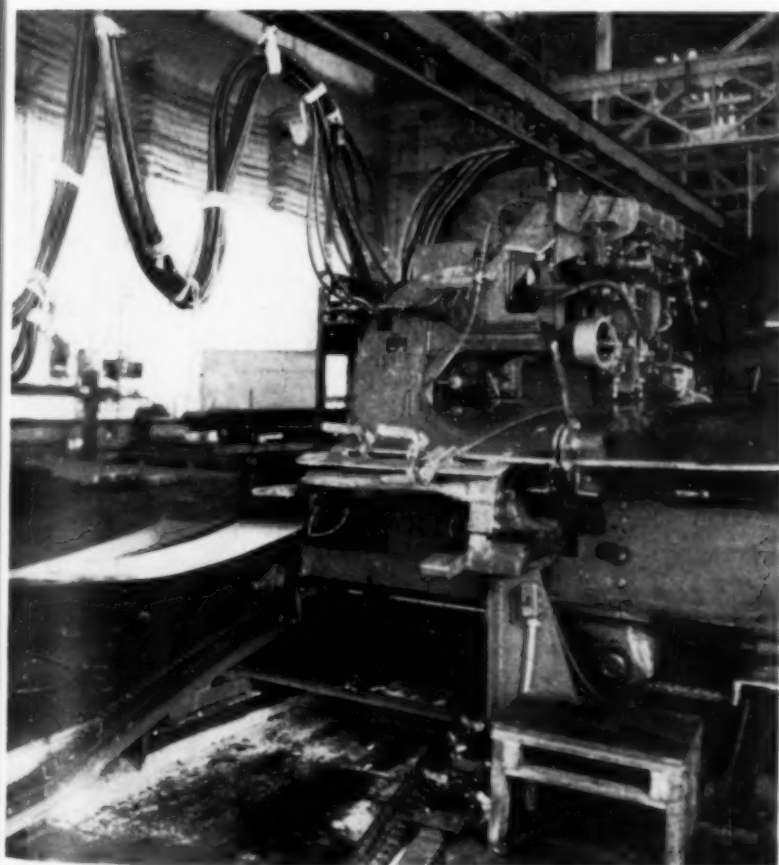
Automatic Spot Welding Machine for Making Joints in Passenger Car Roofs. (Pullman-Standard Car Mfg. Co.)
